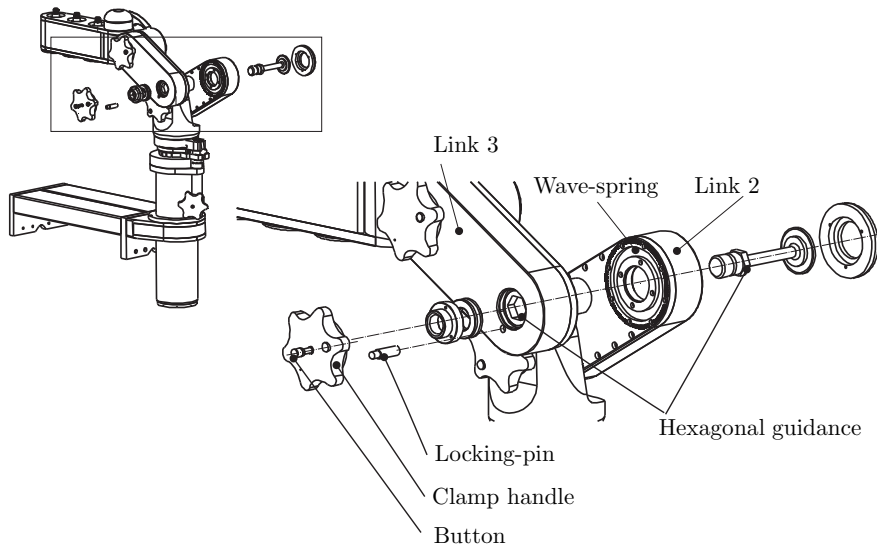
Clamp  $\Psi_2$ , exploded view.
